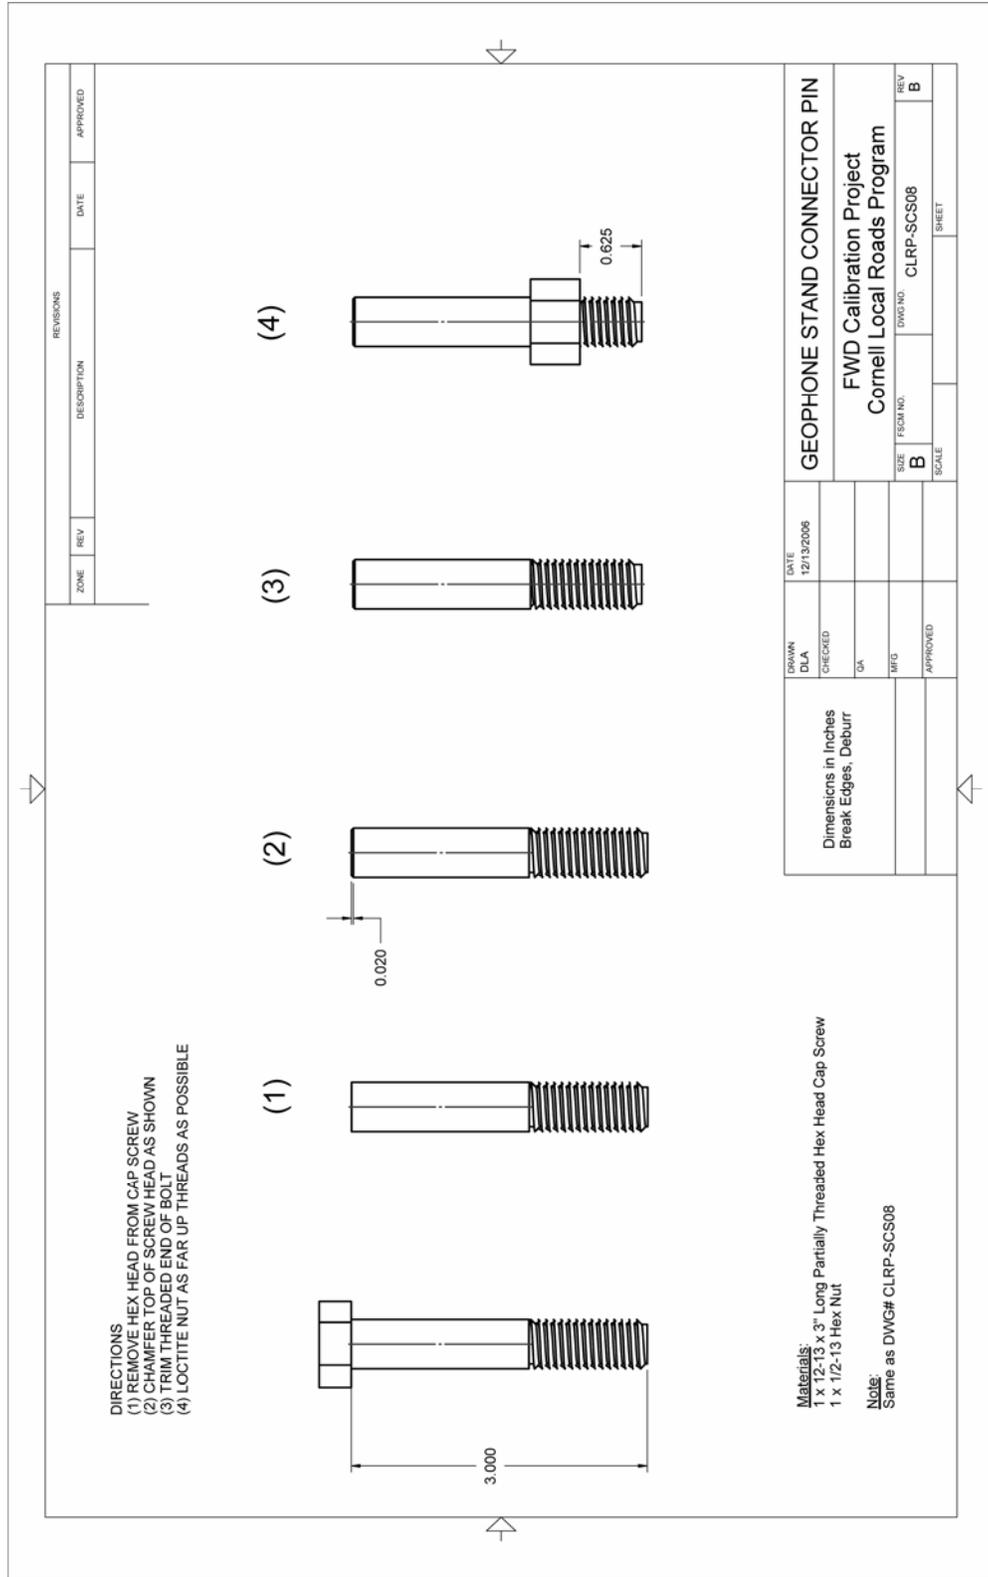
Drawing. CLRP-SCS08 Seismometer Stand Connector Pin.
